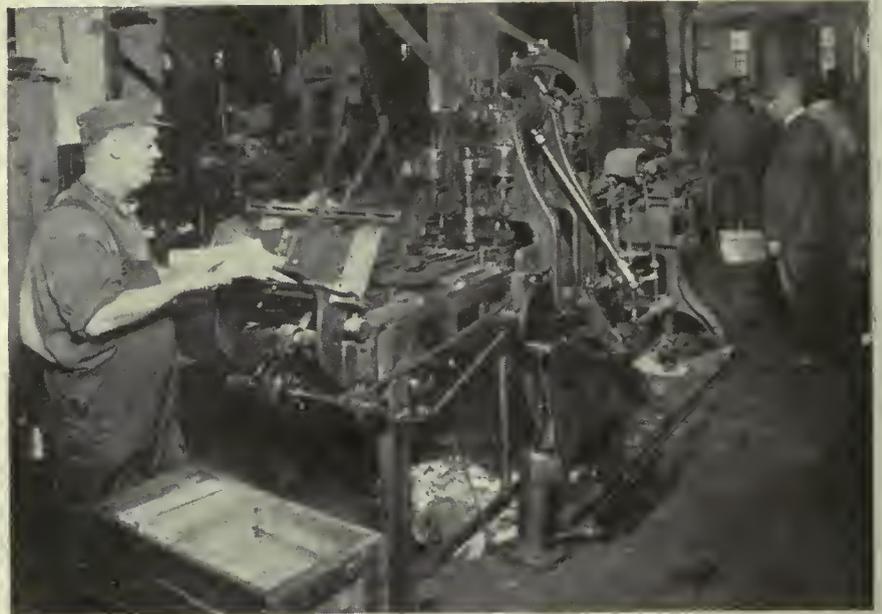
BODY-MAKING MACHINE FOR THE SOLDERED LINE.
